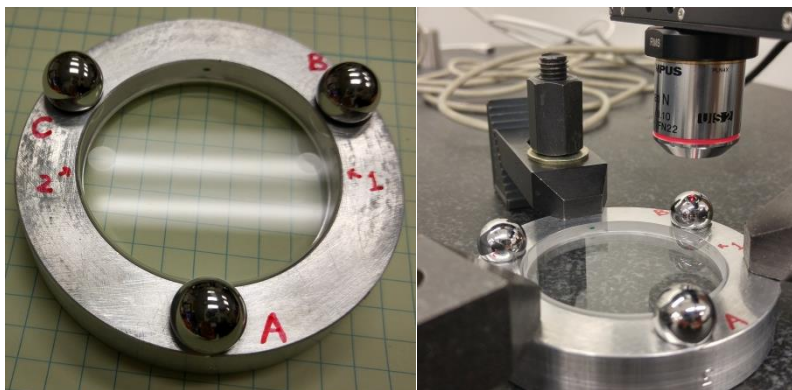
Mechanical reference fixture with Sample 6 (left) and CMM measurement with PSM measuring a ball datum (right).
